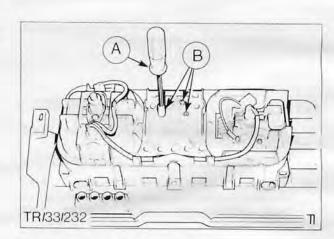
Removing clock retaining nuts A Socket spanner B Securing nuts
